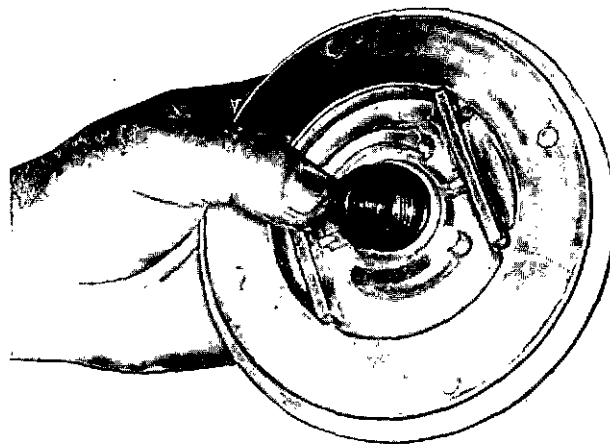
, (T3517). Installing the oil seal assembly into the oil seal plate
